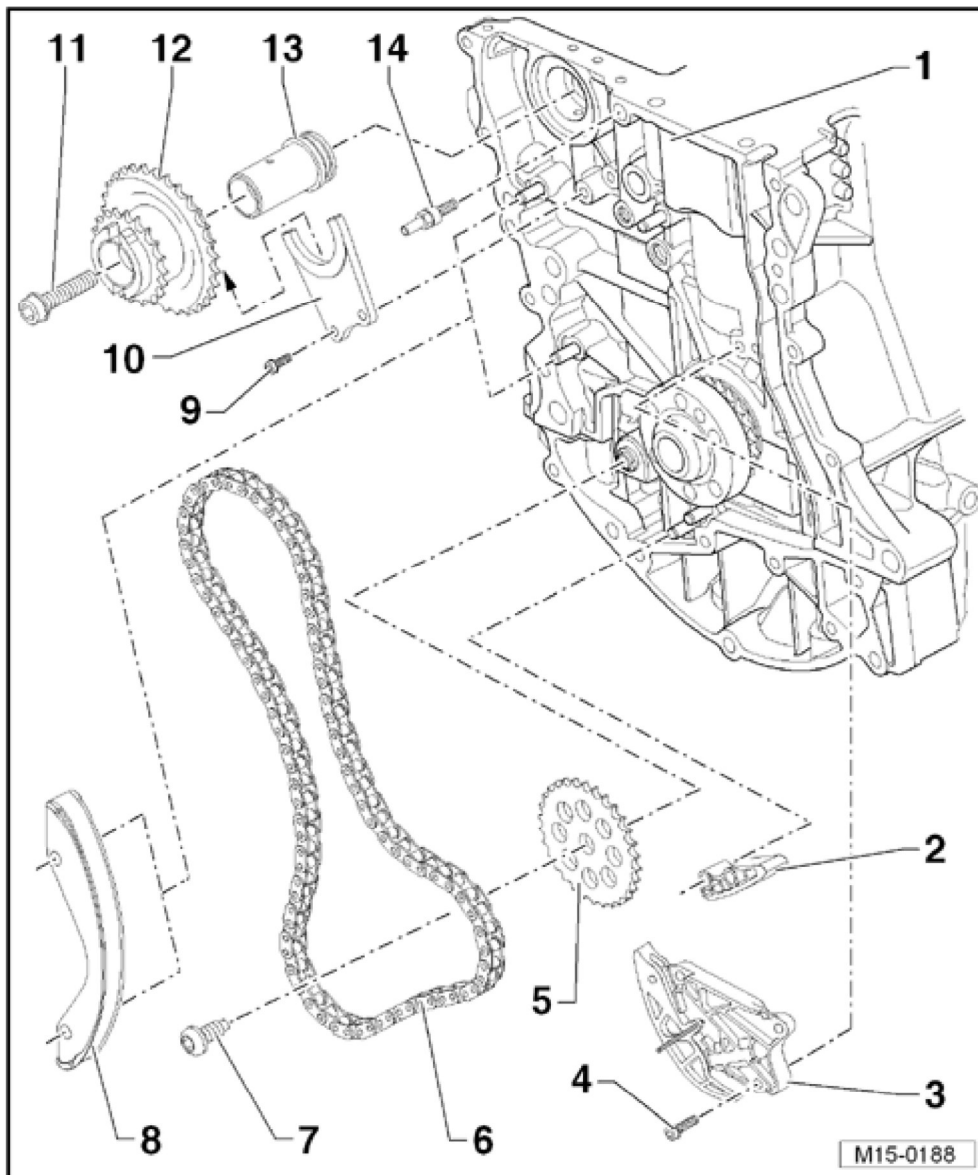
Chain Drive, Assembly Overview - Drive Chain For Timing Mechanism
